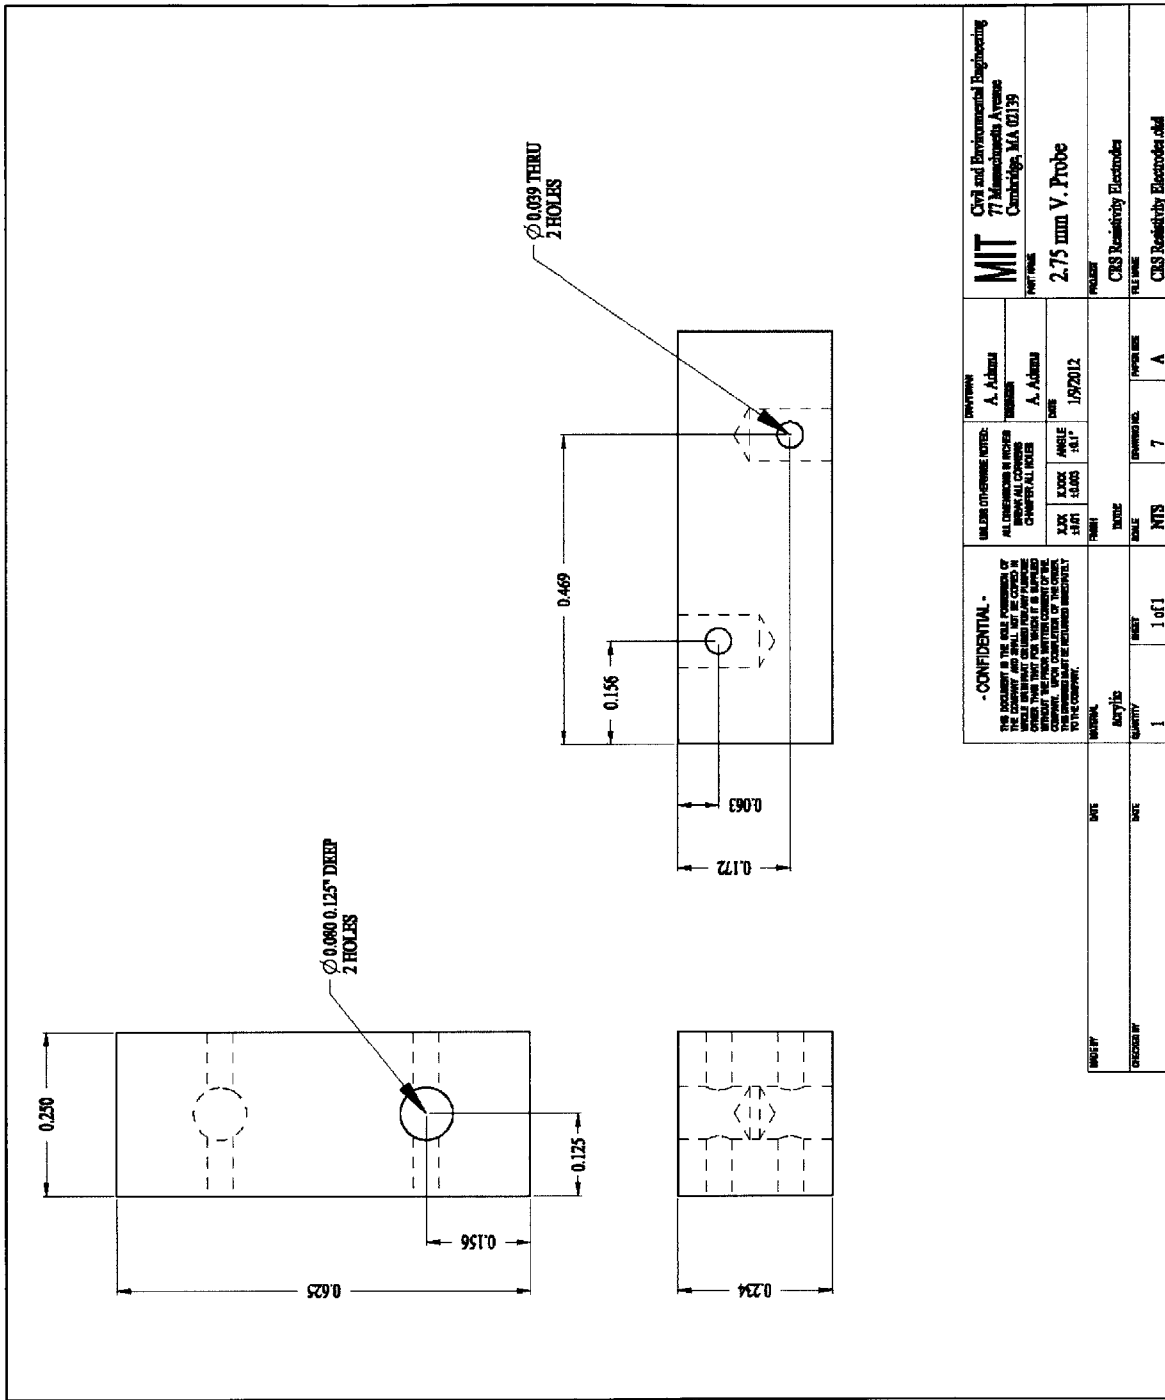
CRS Electrodes: Drawing 7, 2.75 mm probe
